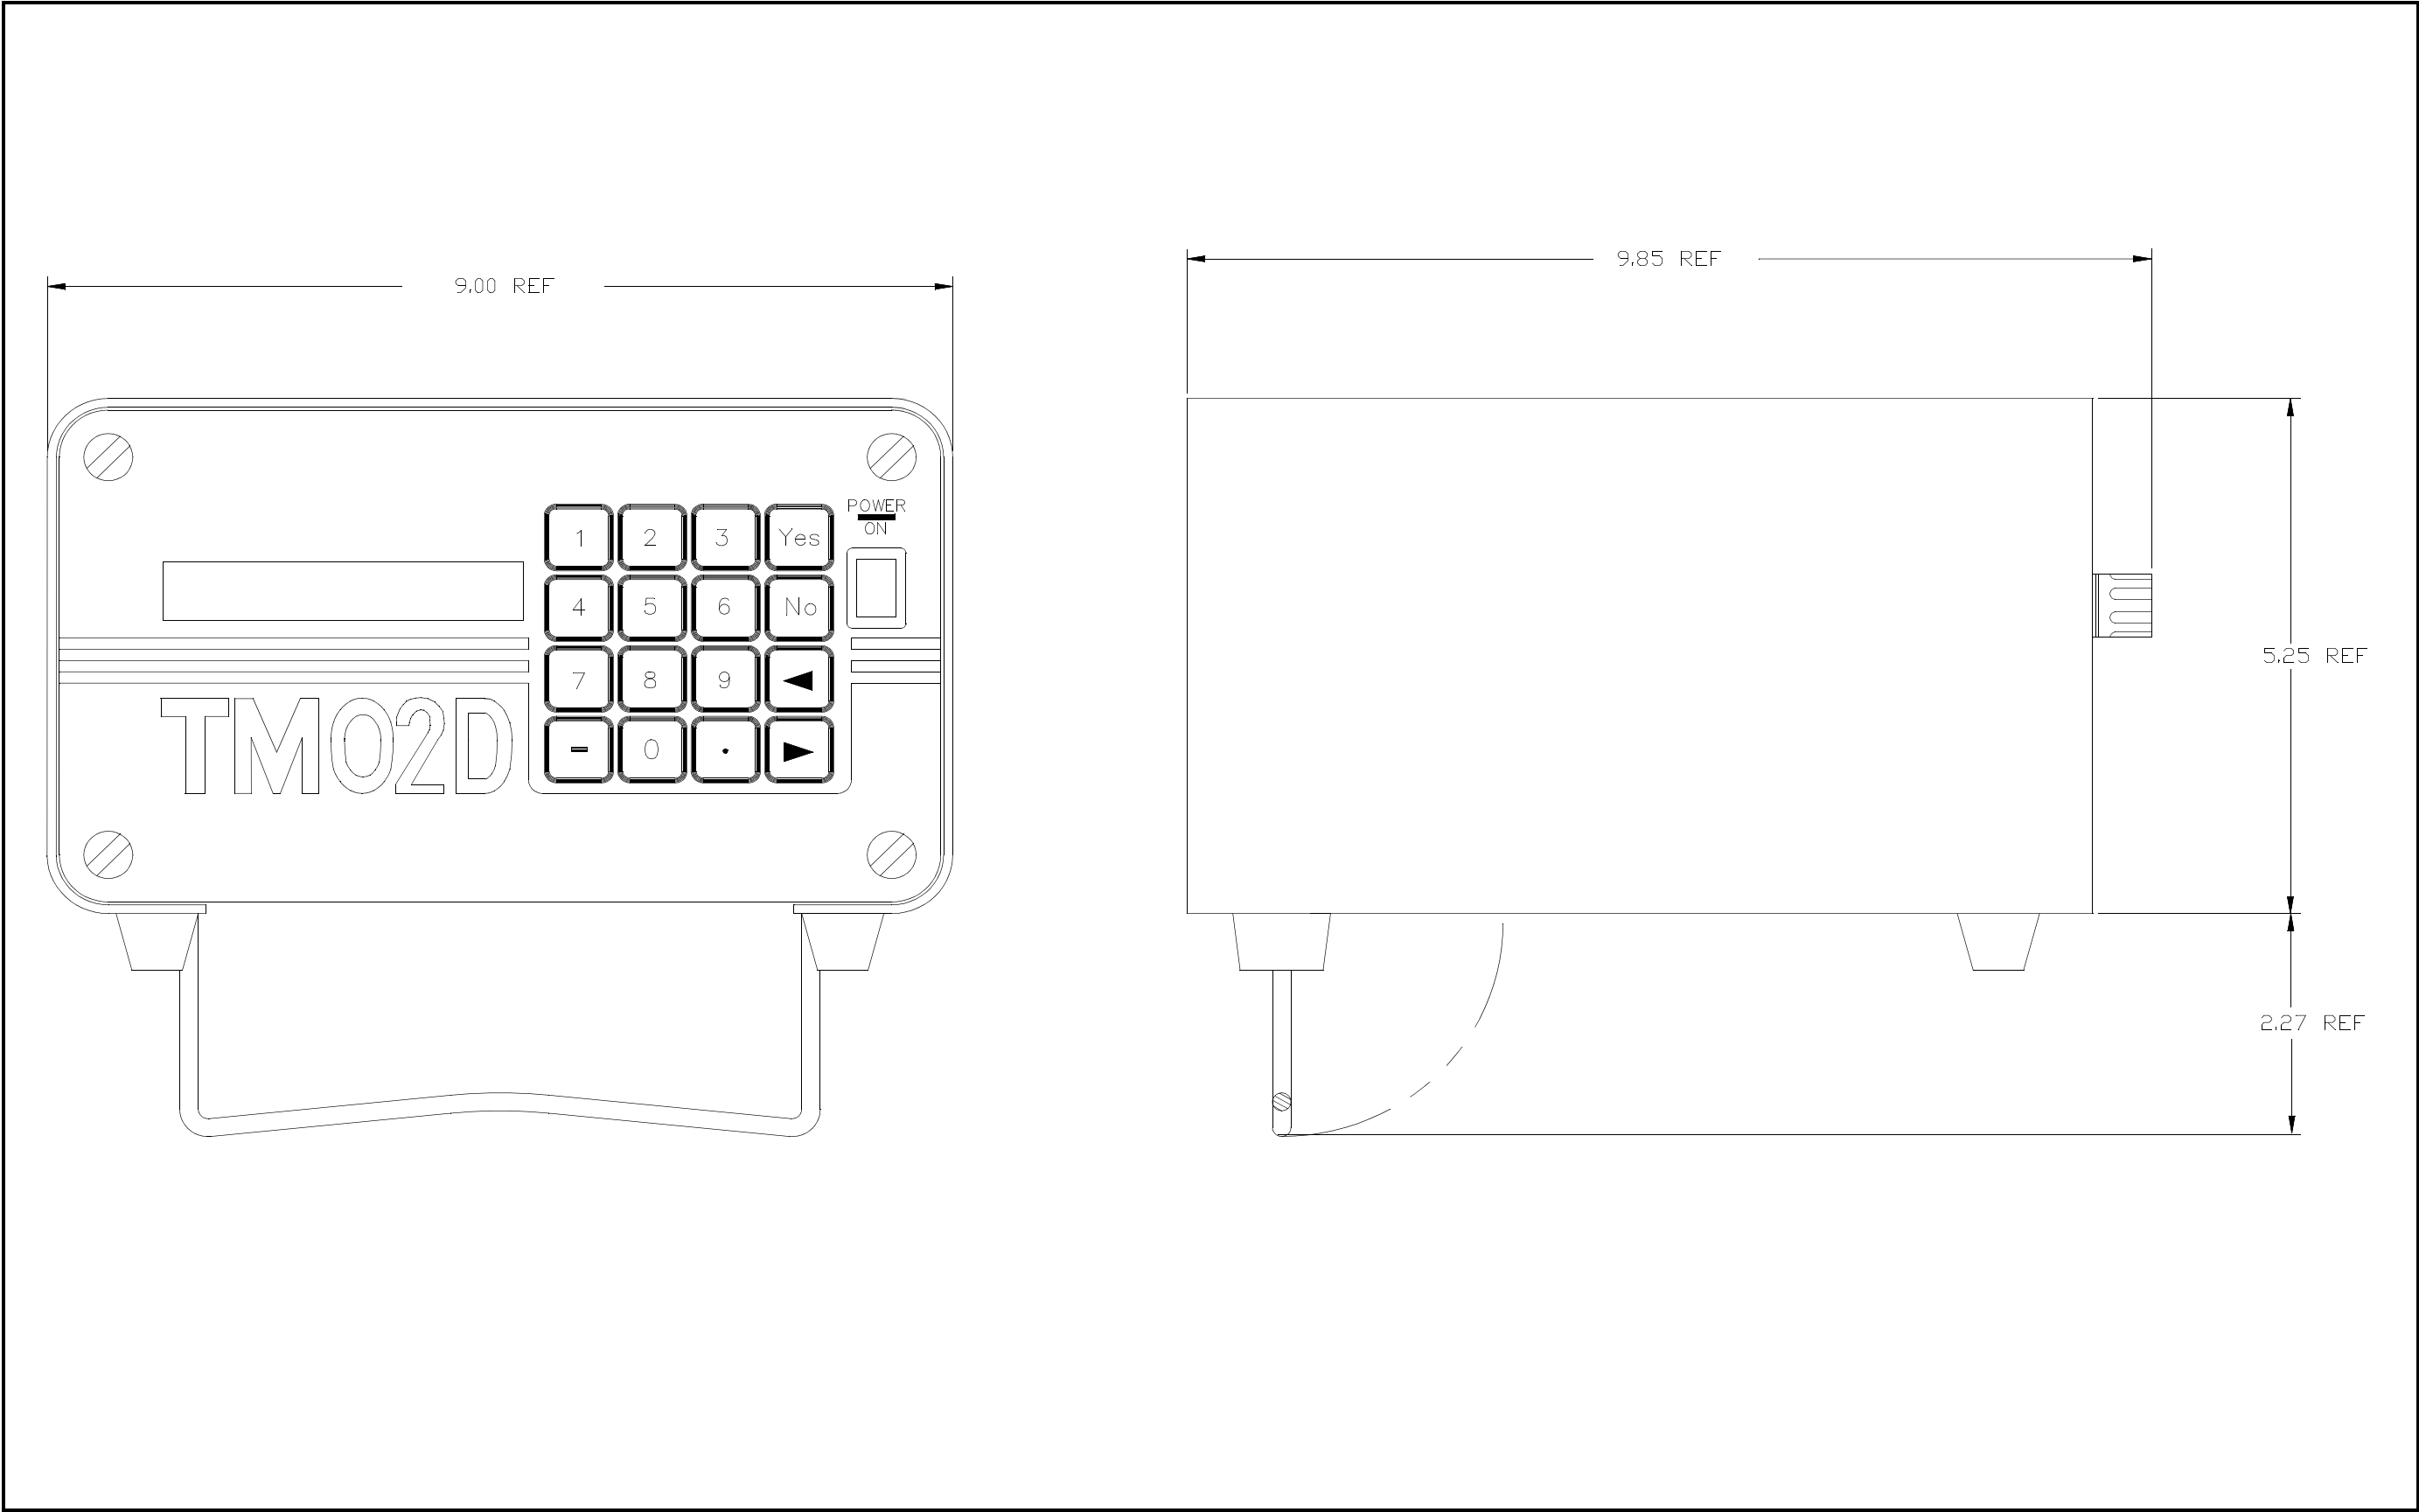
Bench Mount Outline and Installation (Dwg. #712-221)
